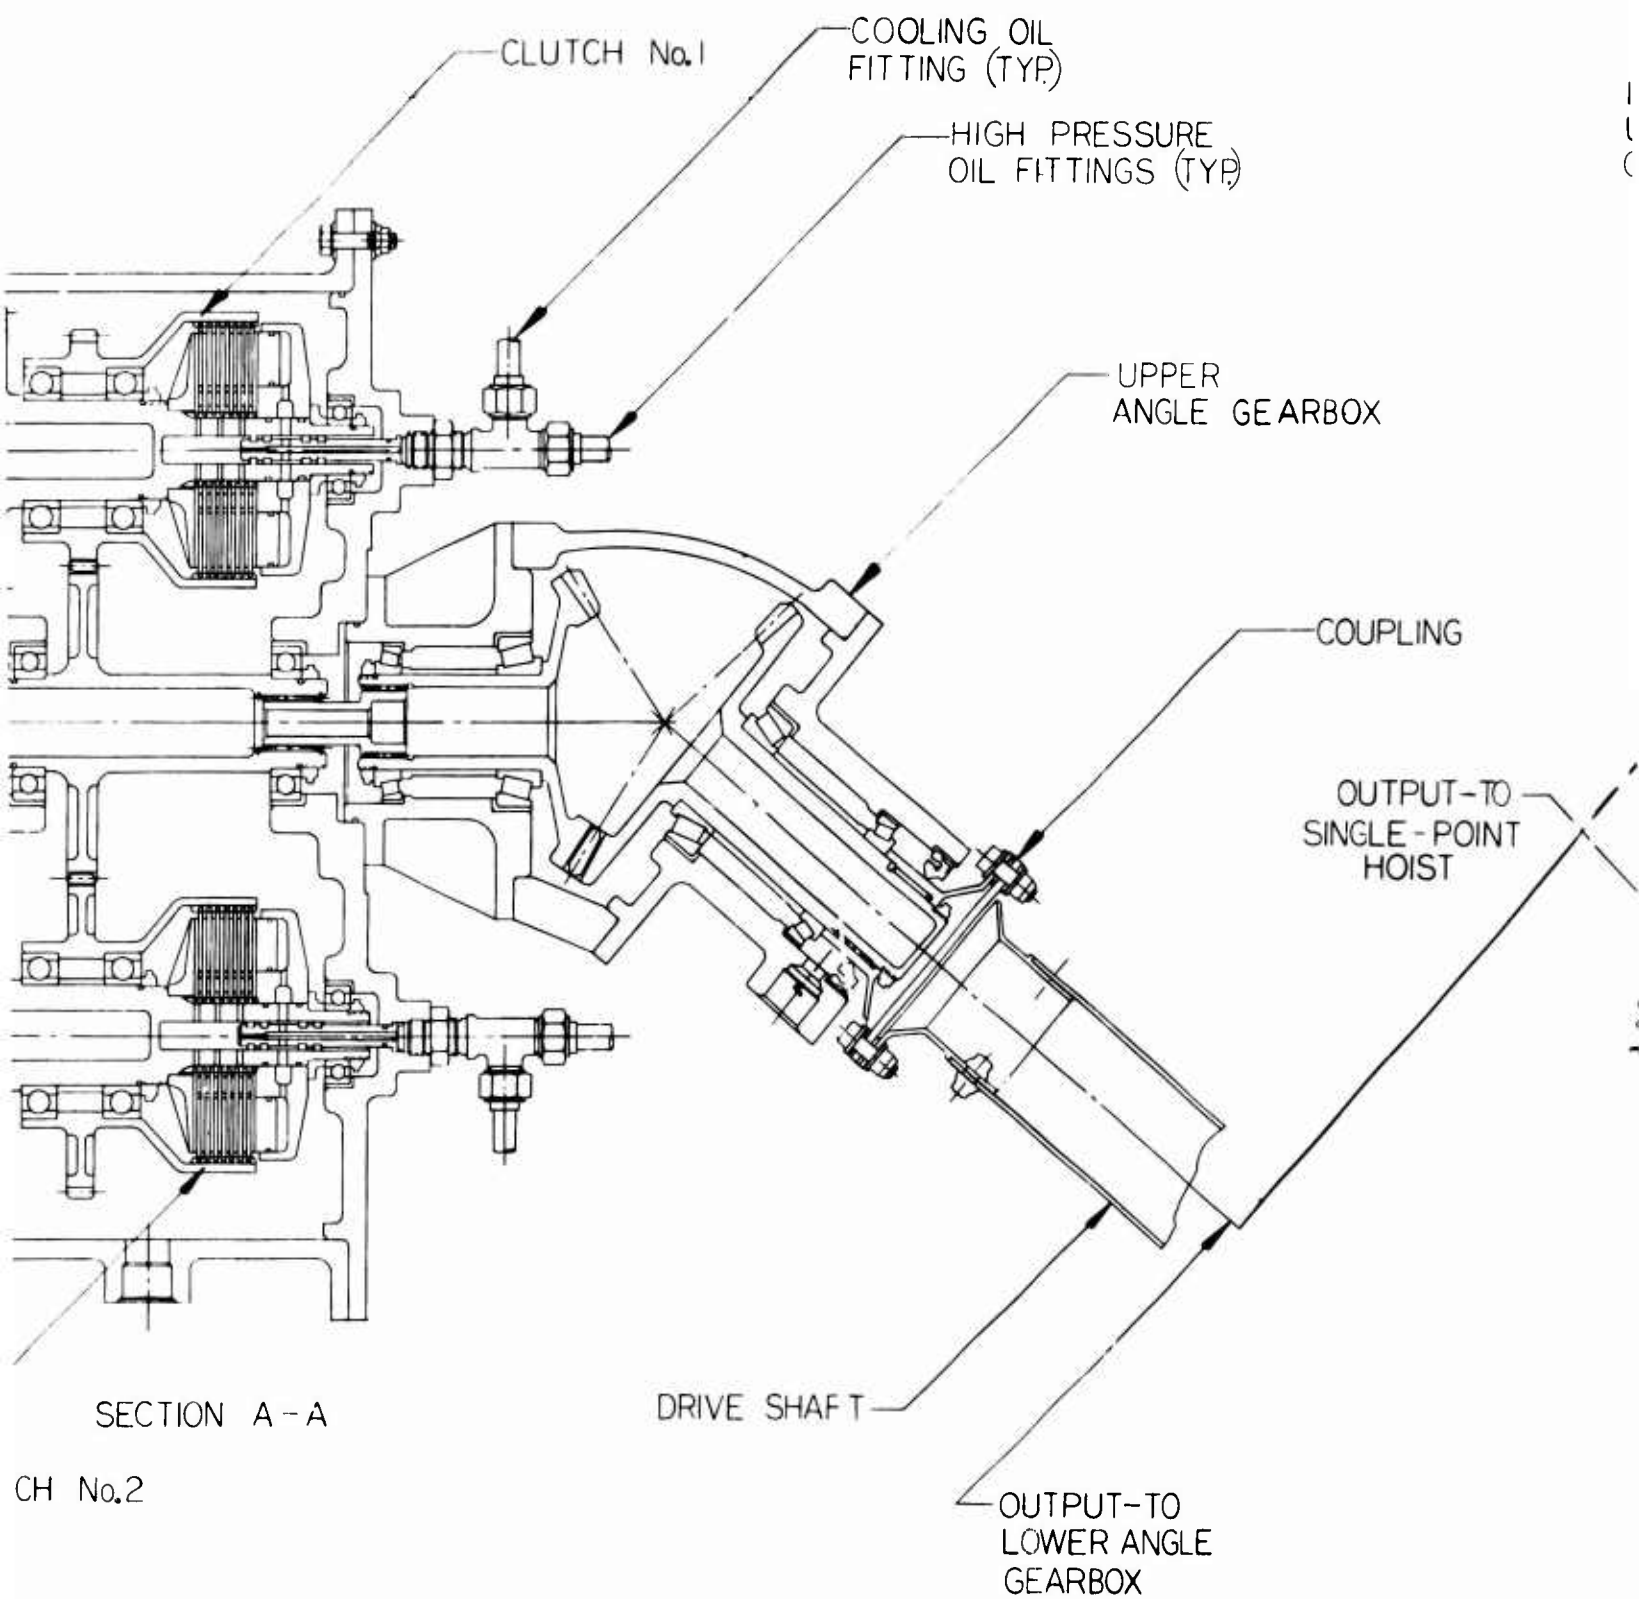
Clutch-Reverser Unit and Angle Gearboxes.
